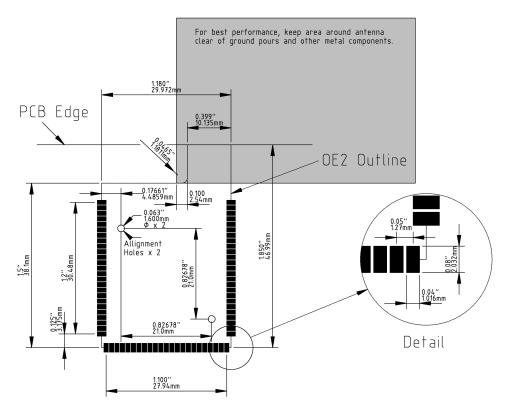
Suggested Footprint For Printed Circuit Board Layout
